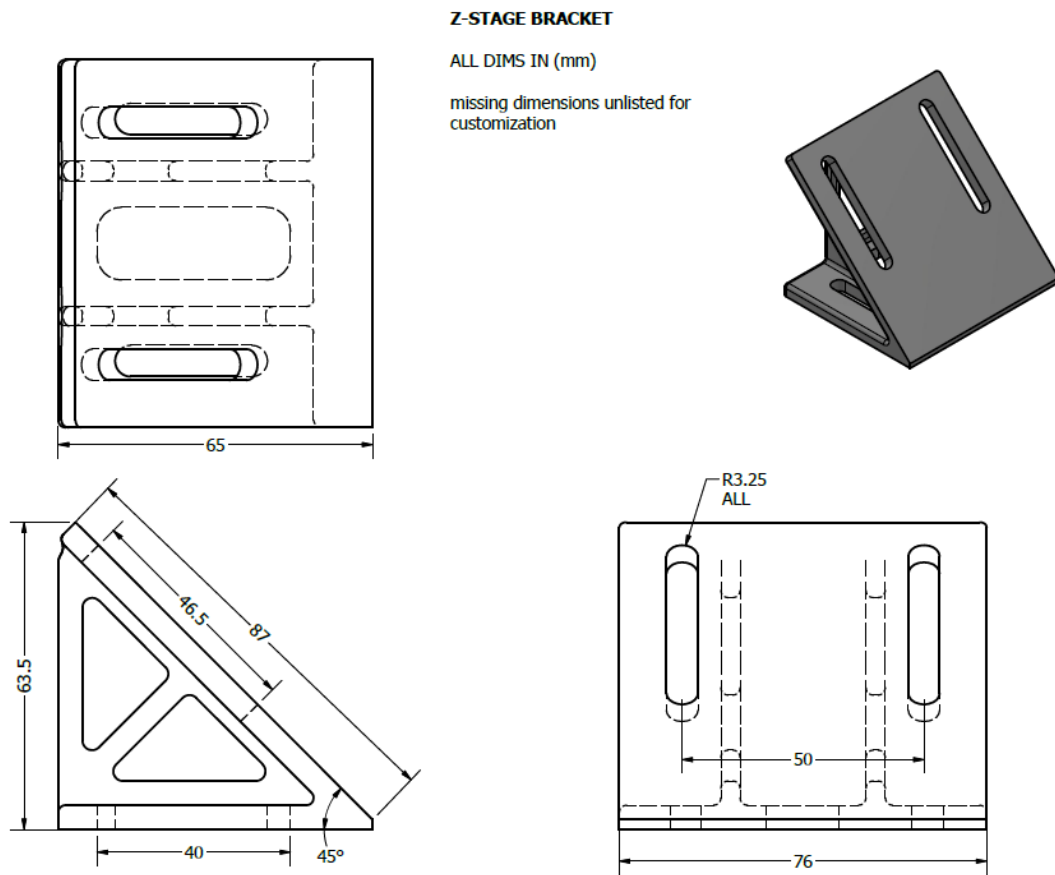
z-bracket part drawings. Unlisted dimensions are open for customization
